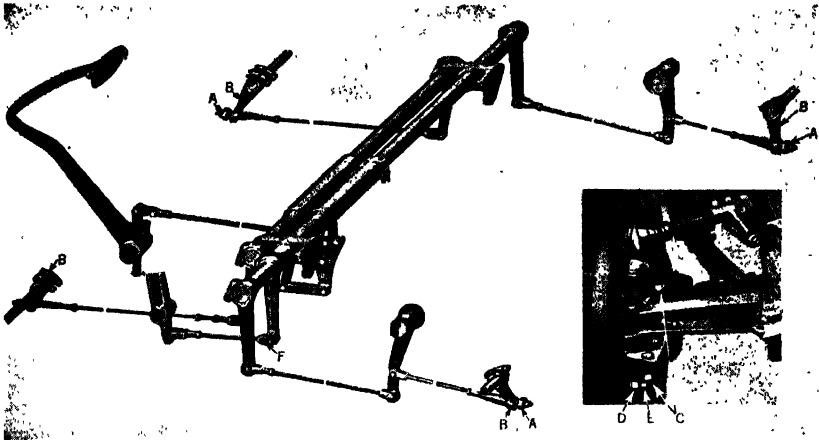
Brake-rod Adjustments. (Packard.)
